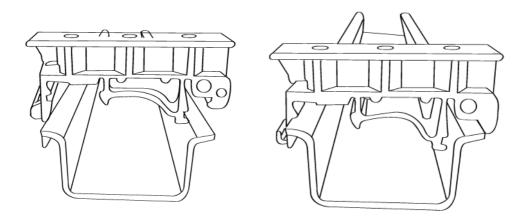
Installing DIN Rail mount kit into DIN Rail
